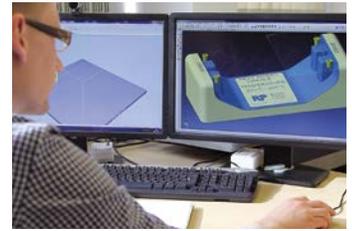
Rutland Plastics engineer designing a heat-staking fixture.
